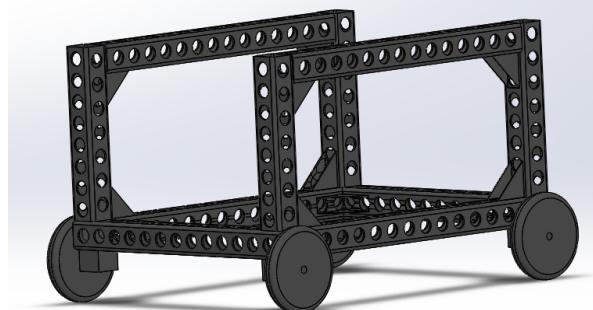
Four-wheel chassis with stand-in wheels and sheet metal material modeled in Solidworks
